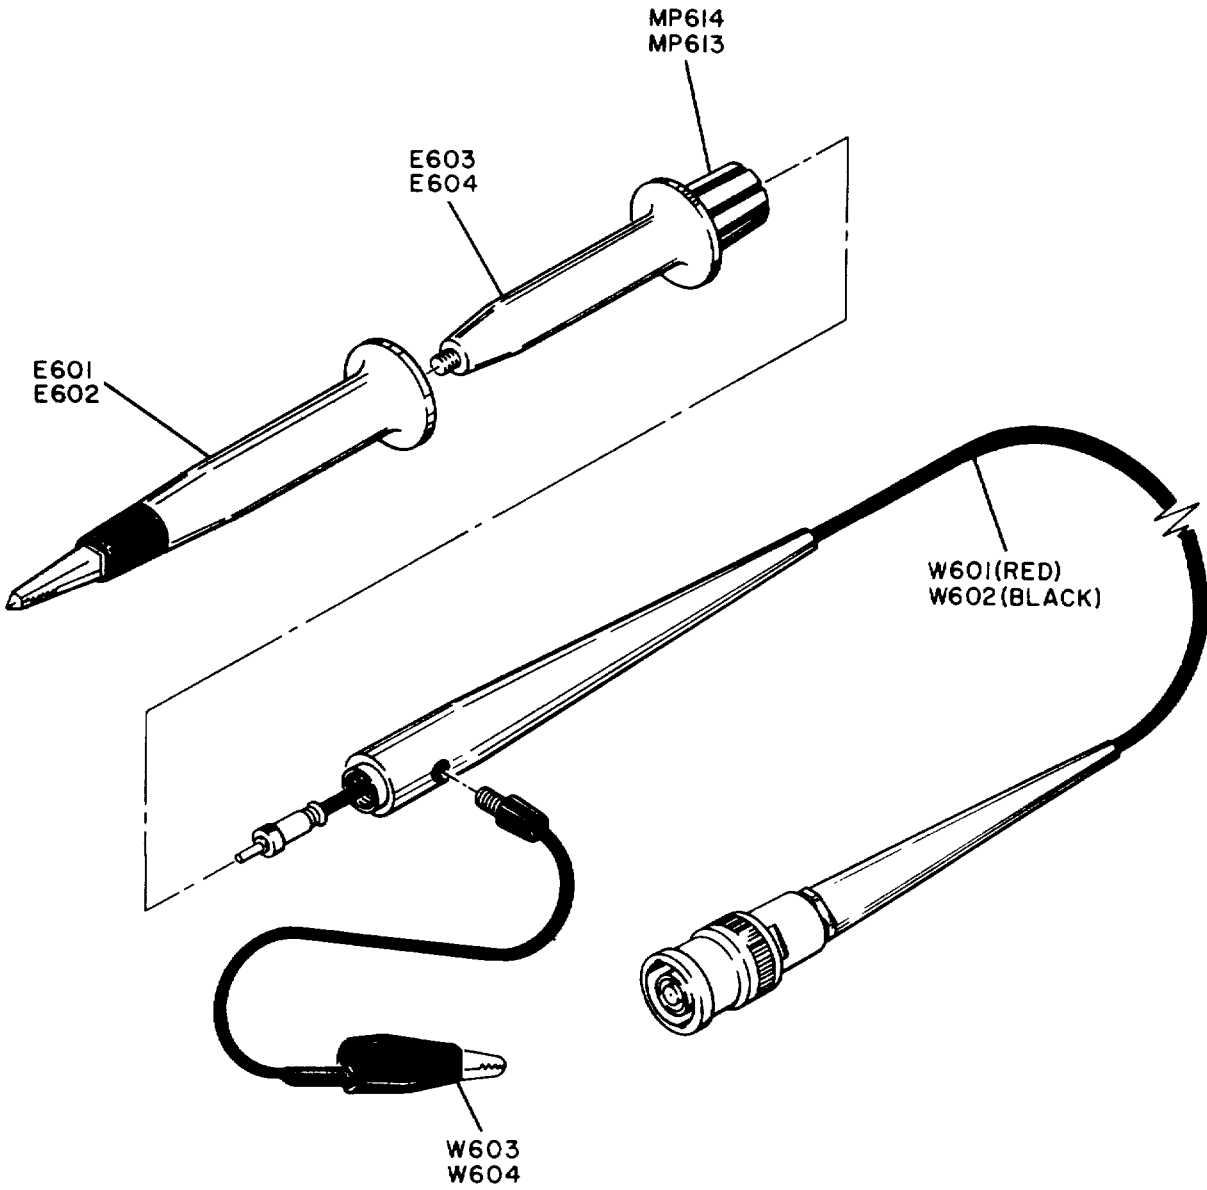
MX-2817/U Test Prod, Location of Replaceable Parts.
